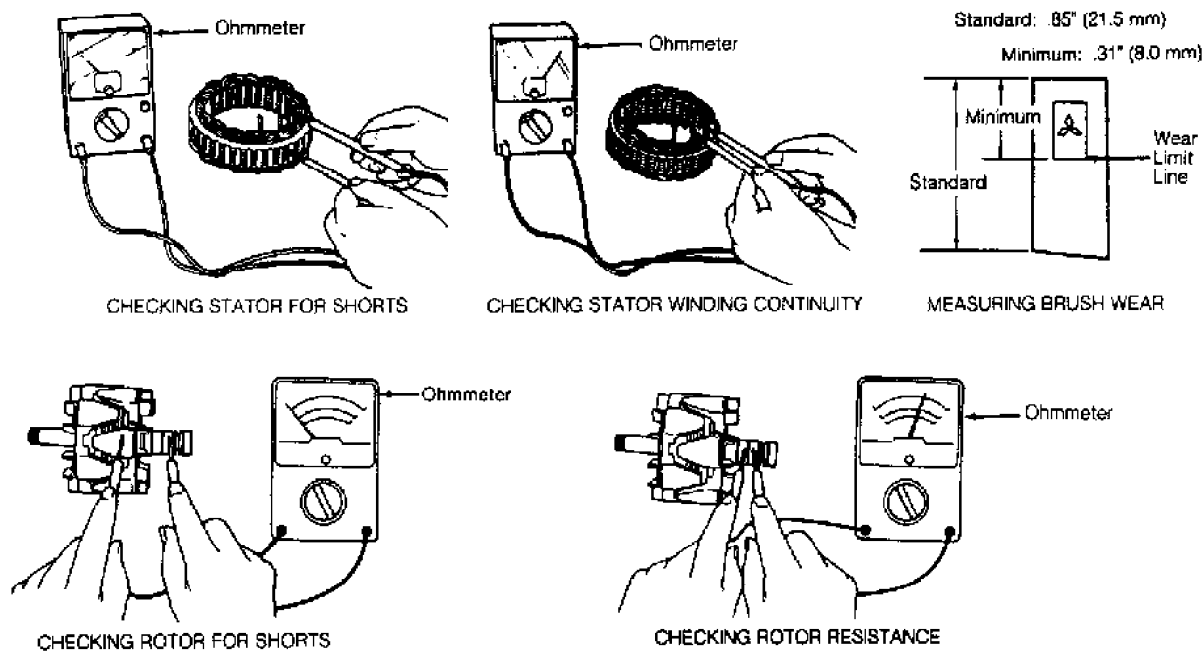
Testing Alternator Stator, Rotor & Brushes
